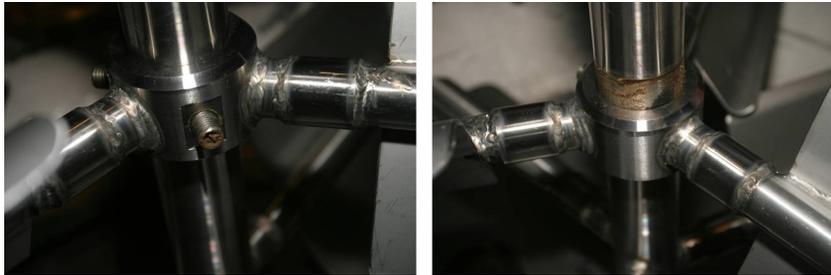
The hub is secured to the shaft by means of bolts with dome head nuts, which are exposed to product that may collect in and around the screw head. This non-welded hub-to-shaft joint also lacks a food grade gasket that could seal the dead spaces in the groove and avoid crevices at points of metal-to-metal contact. Ingress and accumulation of product and/or microorganisms at the inside are observed. Welds also have a high degree of roughness. *Courtesy of Burggraaf & Partners B.V., www.burggraaf.cc.
